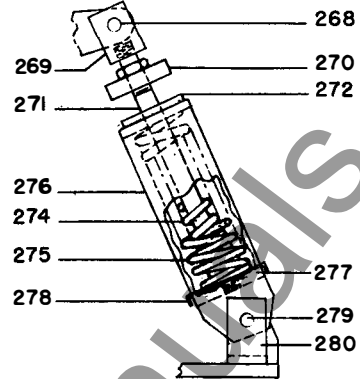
B Complete Spring Assembly (Ref. No. 273)
